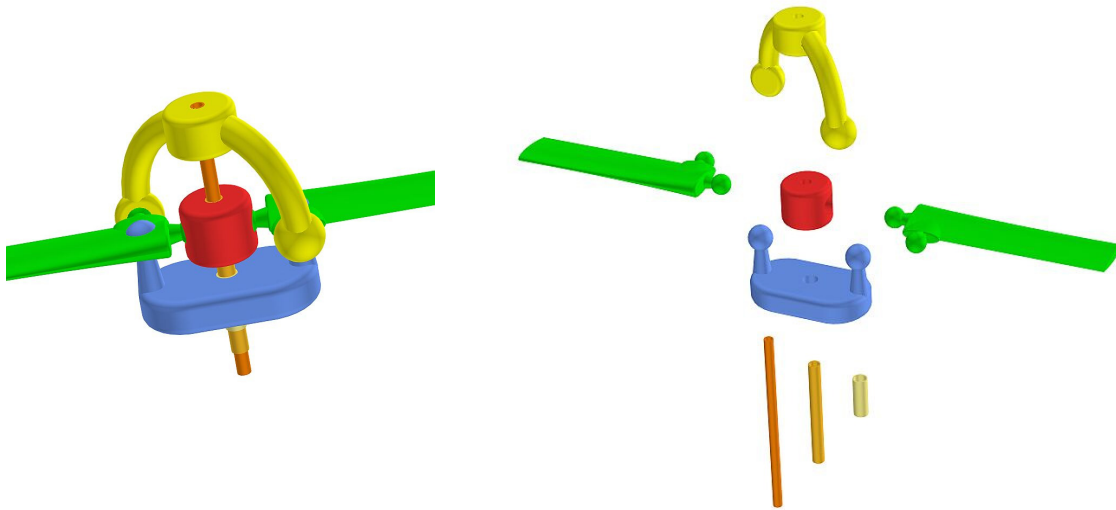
Redesigned rotor structure: Only 8 parts [51].
